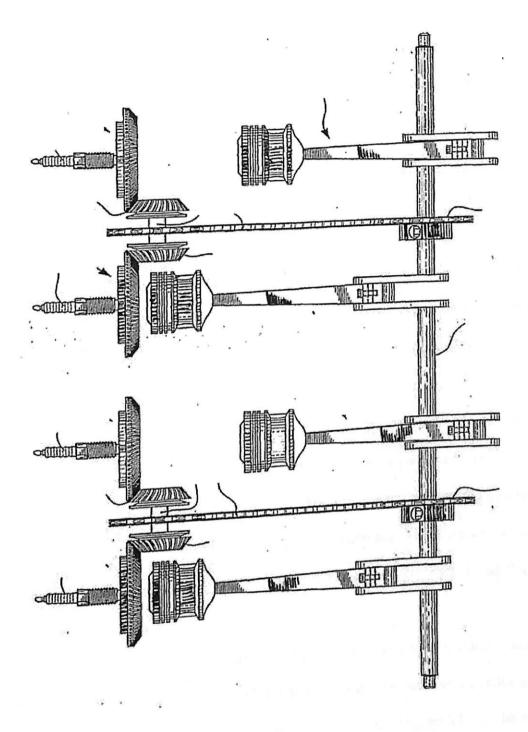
Front view of the Disc Valve System with multi-piston engine.
